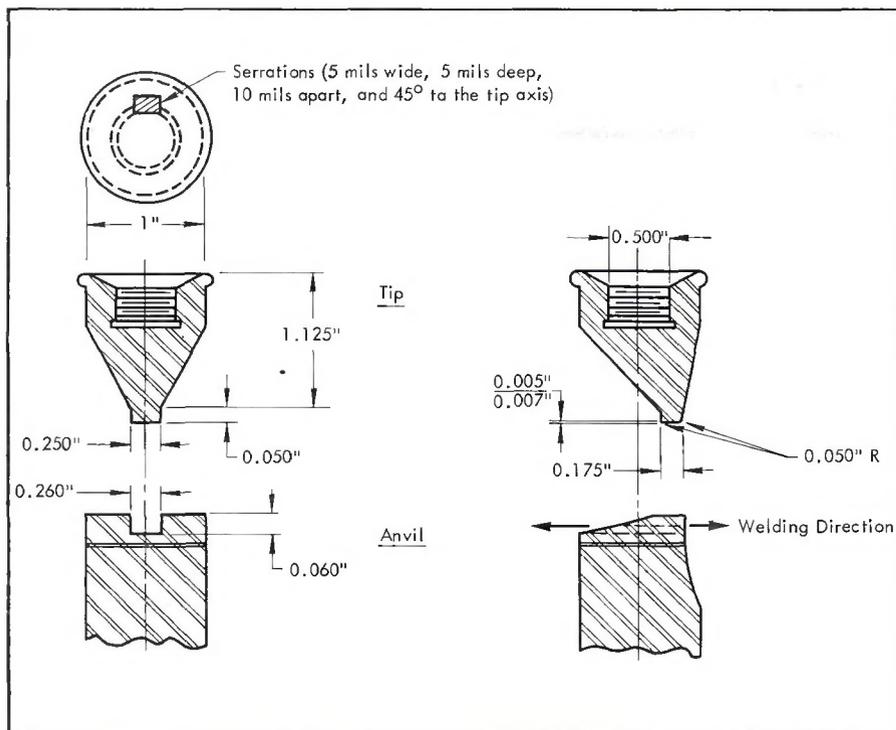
Ultrasonic tube crimp-weld tip and anvil configuration
